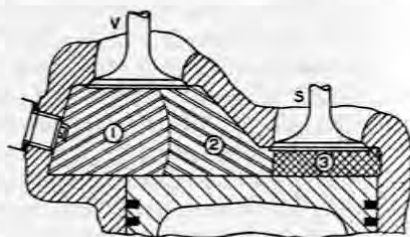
Illustration of a wedge-shaped combustion chamber.
